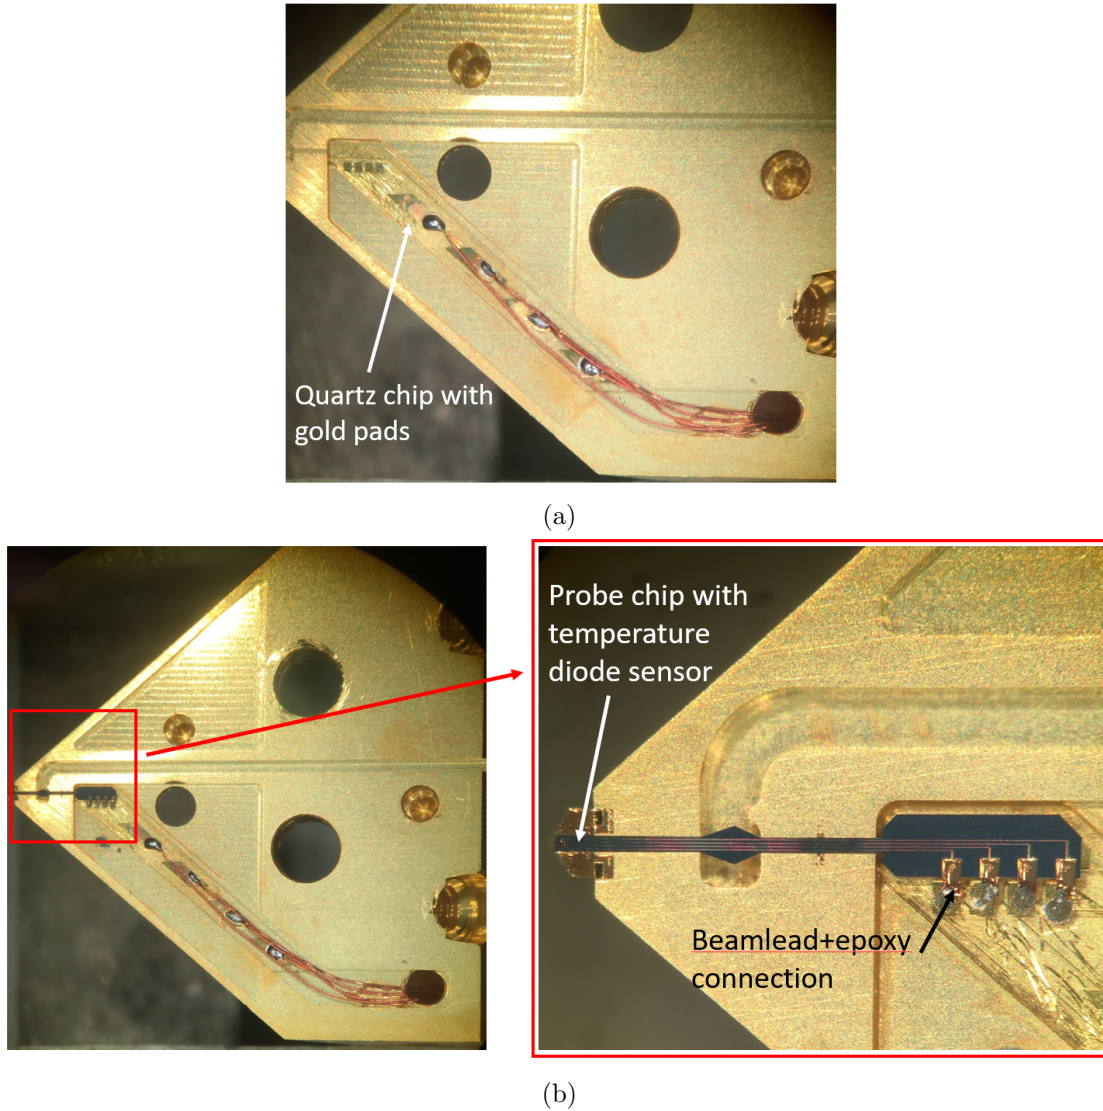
Assembling of the probe thermometer into the waveguide housing. (a) Mounting quartz chip into the recess and solder wires onto the gold pads (b) Tacking down the probe chip with integrated diode temperature sensor and strengthened the connection with epoxy.
